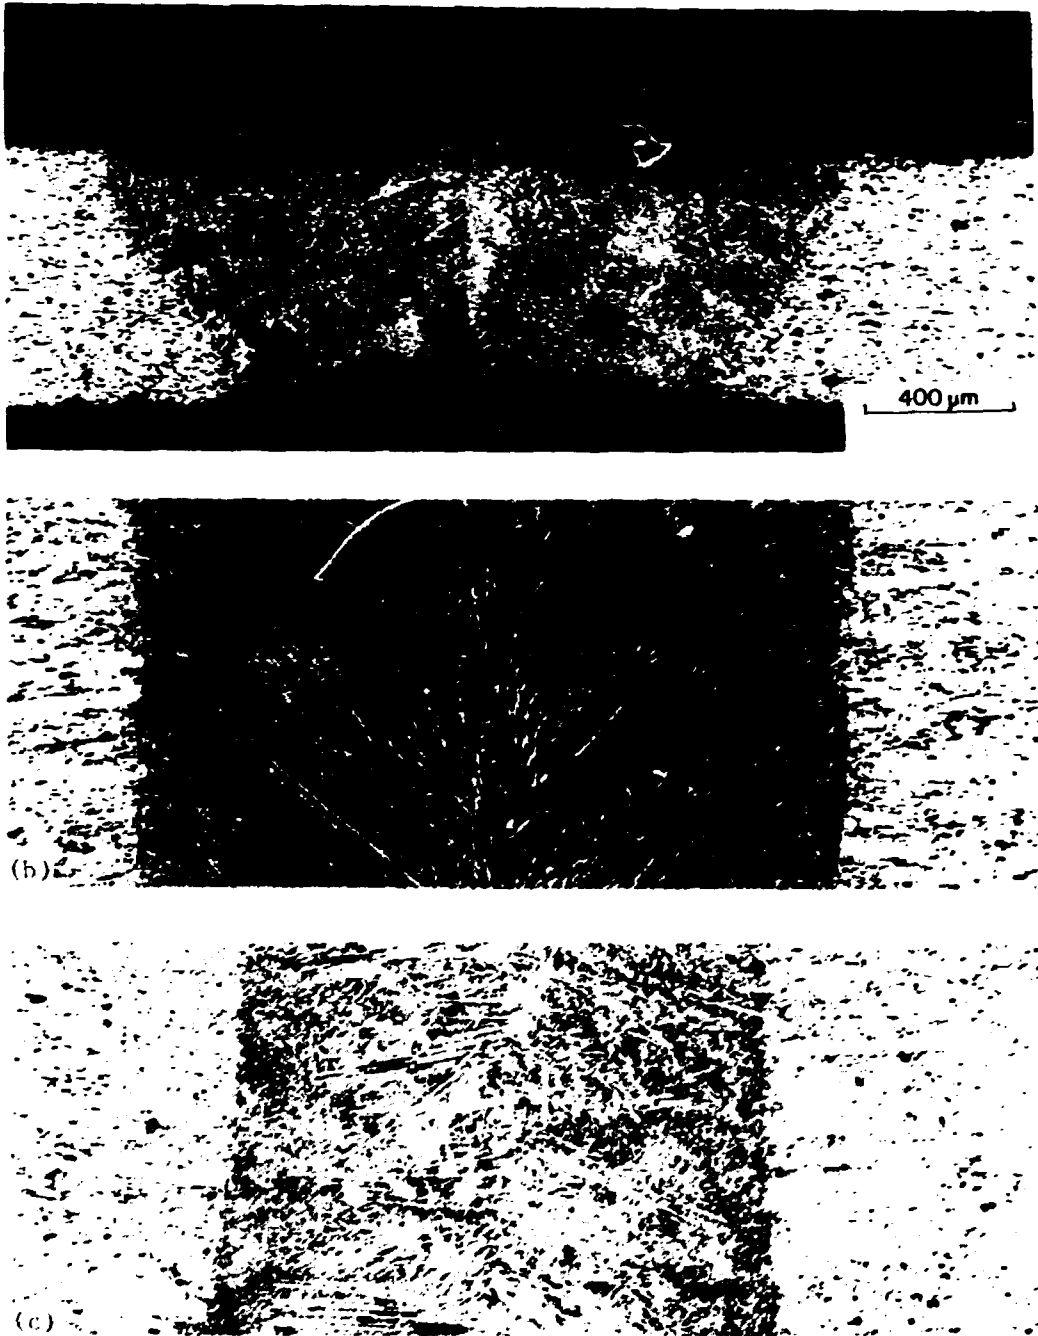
Metallographic sections of welds made in IC-205; (a) and (b) are transverse and top views of an electron beam weld and (c) is a top view of a gas tungsten arc weld.
